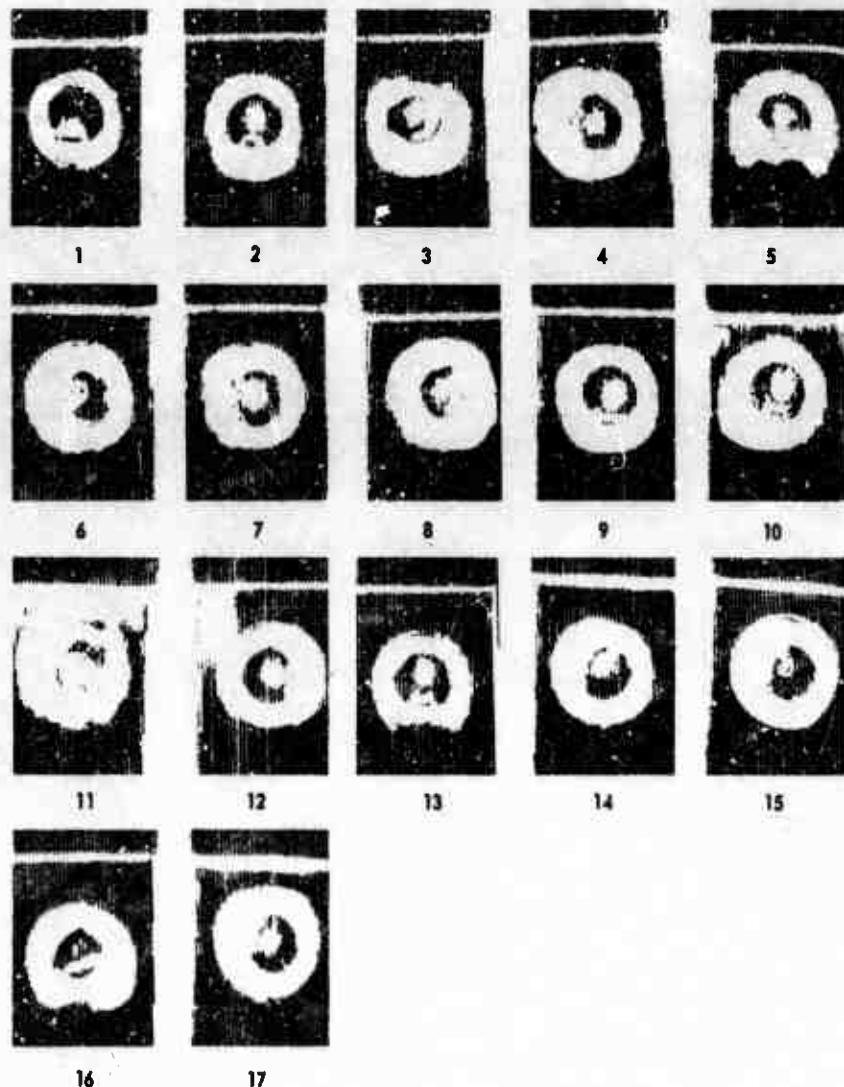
C-Scan Record of Series 11 Welds.
